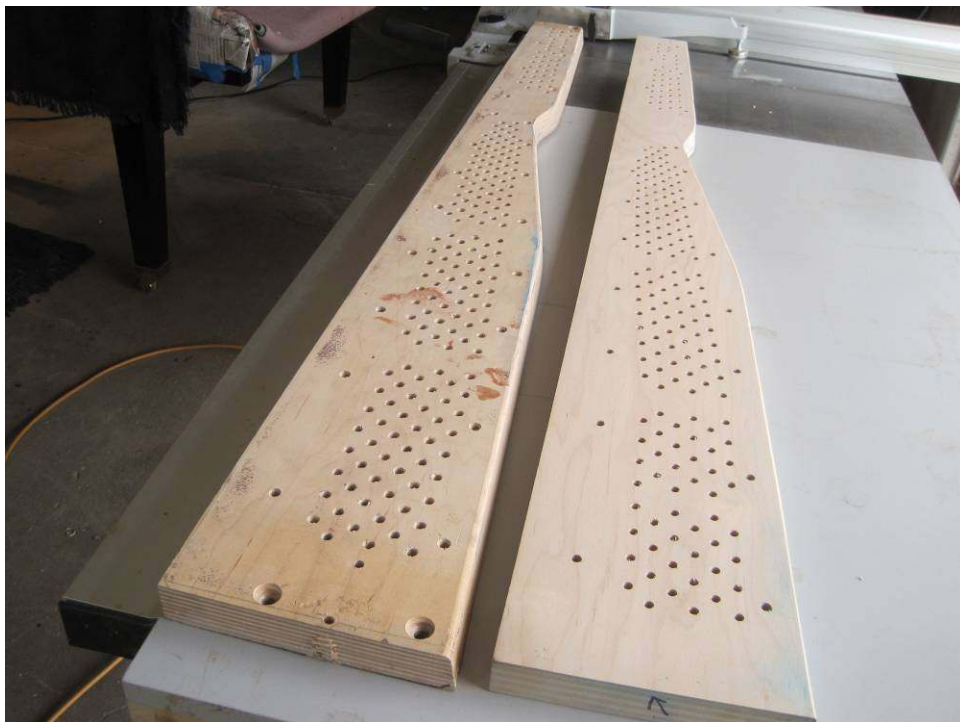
The newly drilled pinblock side by side with the old block. The large countersunk screw holes on either end will be drilled once the pinblock is glued to the ledges inside the rim.
